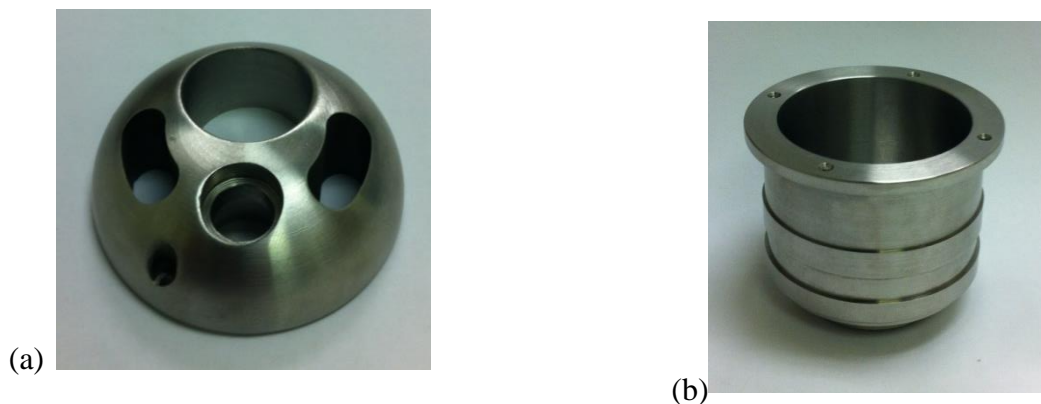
(a)Top view of front cap, (b) side view of front rim.
